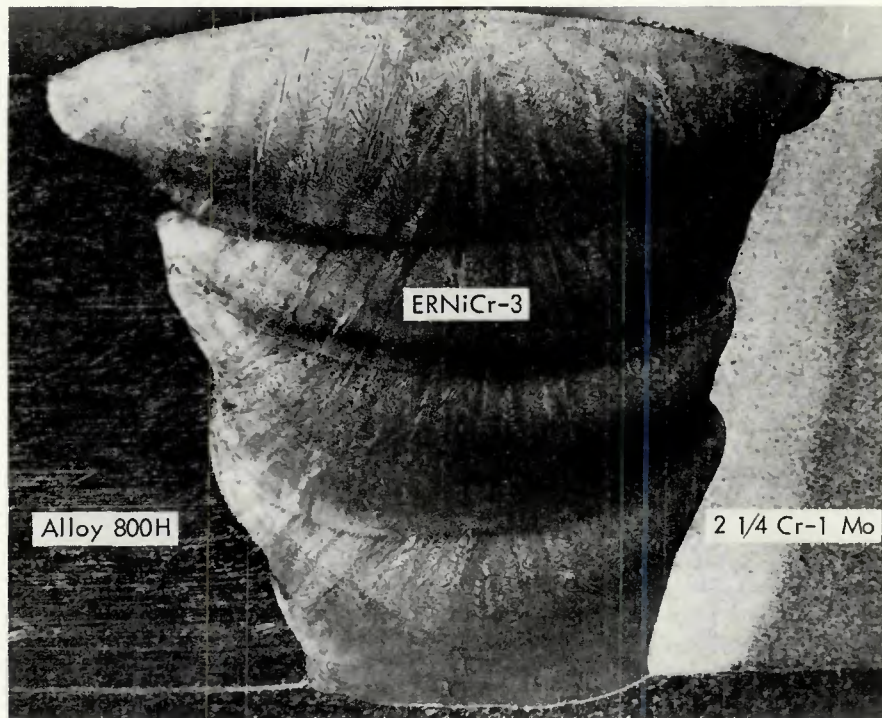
Weldment of 2 1/4 Cr-1 Mo steel to alloy 800H made with "hot-wire" gas tungsten arc process and ERNiCr-3 filler metal
